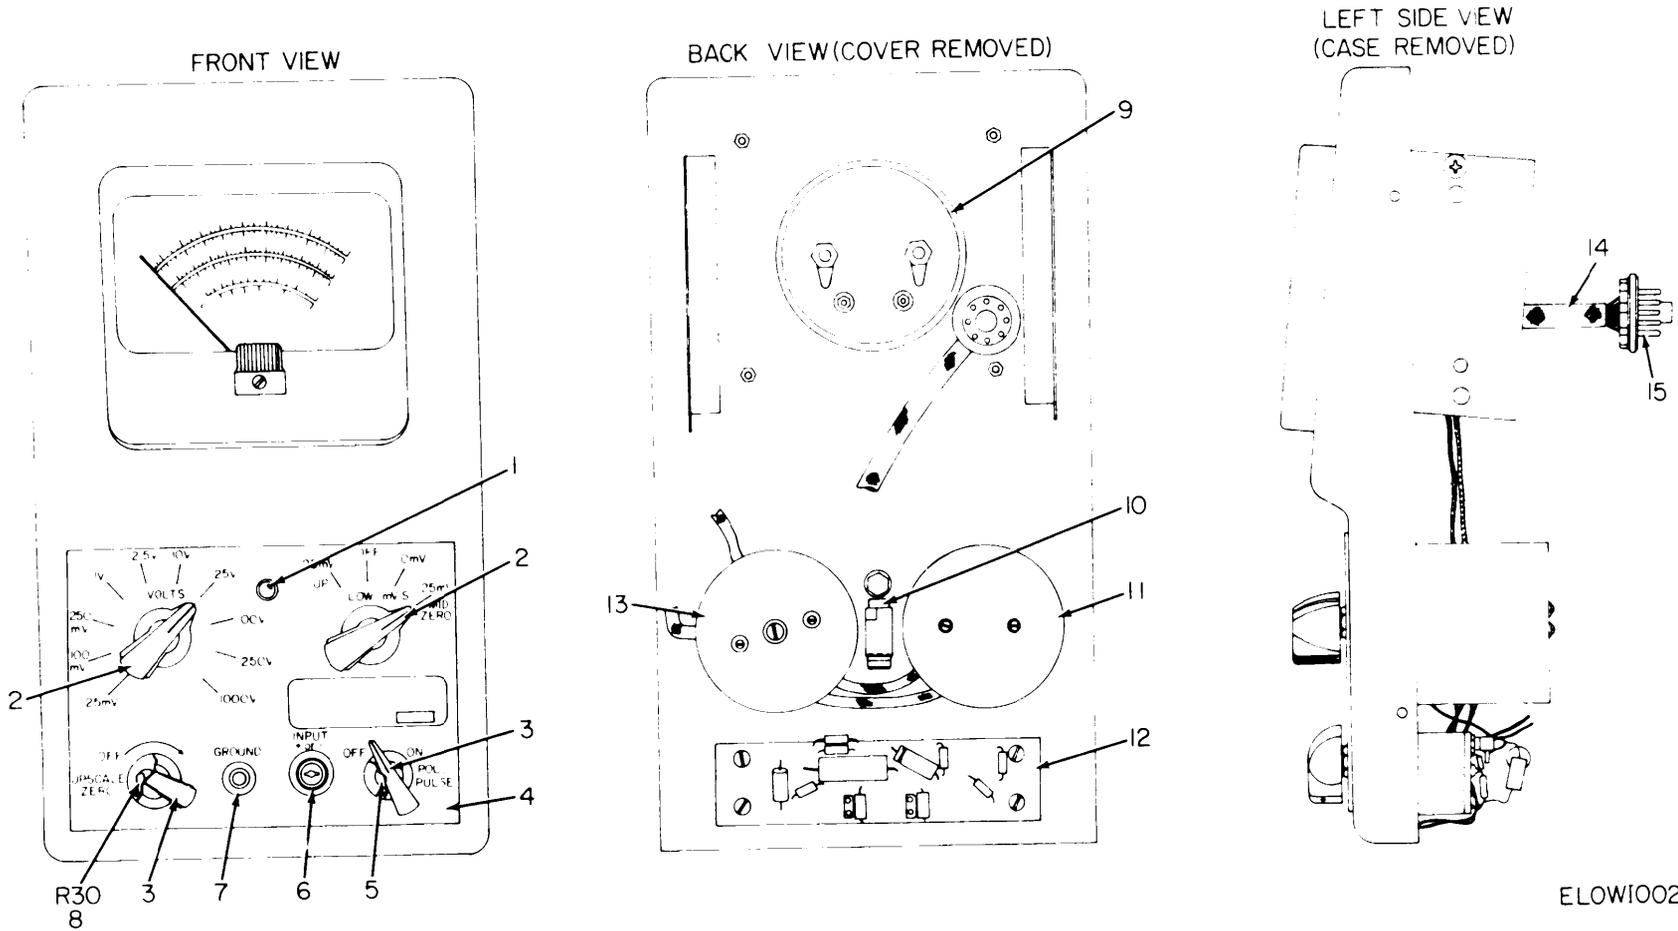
Voltmeter, Electronic ME-227/U, Panel Assembly.
